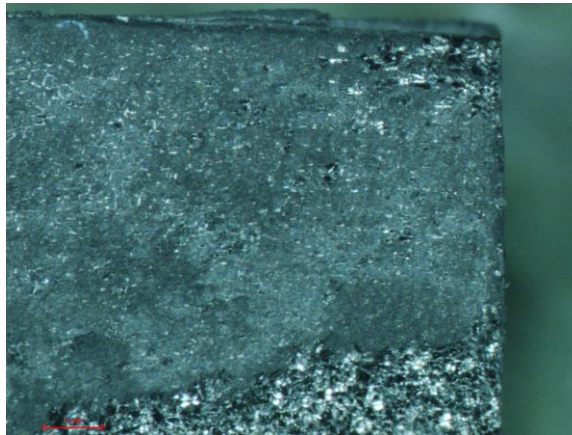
D2 Sample 4 Impact Test 50x W Side Bottom Corner
